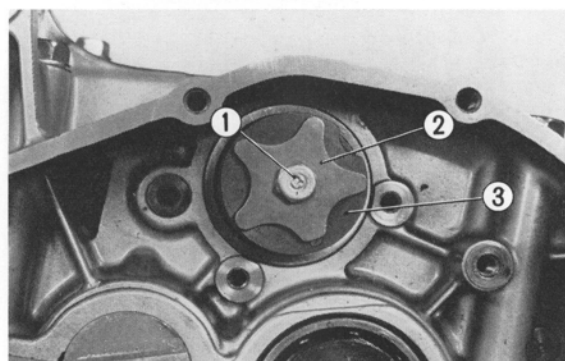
① 6 mm bolt ③ Drum gearshift center
